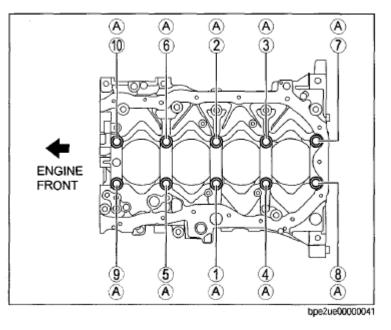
Identifying Lower Cylinder Block A Bolt Tightening Sequence
